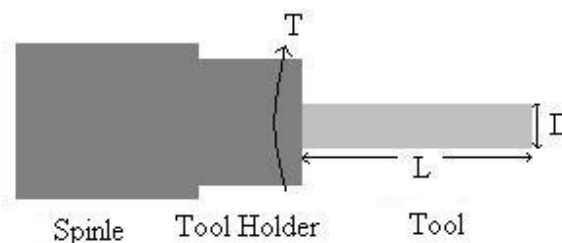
Tool- tool holder/spindle assembly and changing parameters
